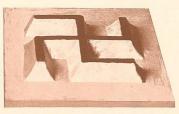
Model showing final appearance of Zinc Line Plate after flanges have been bounded off by the 4th Etch.
